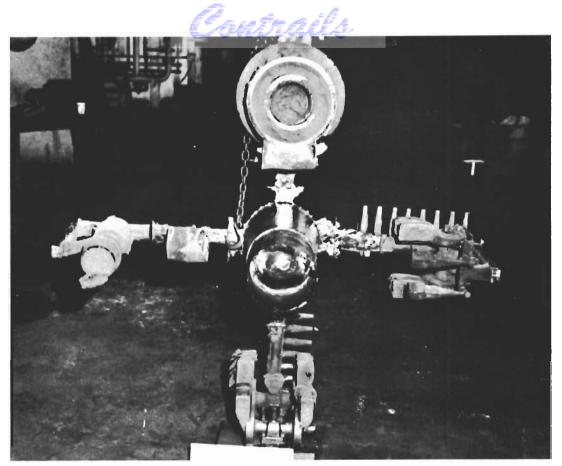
Castings Poured on Heat 3 after Removal of Mold Material
